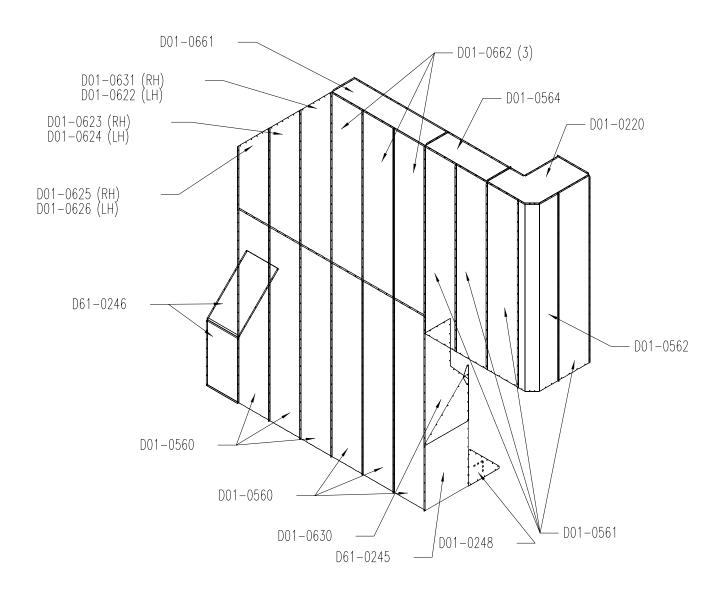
2022 and 2026 Outside Side Duct Assembly
